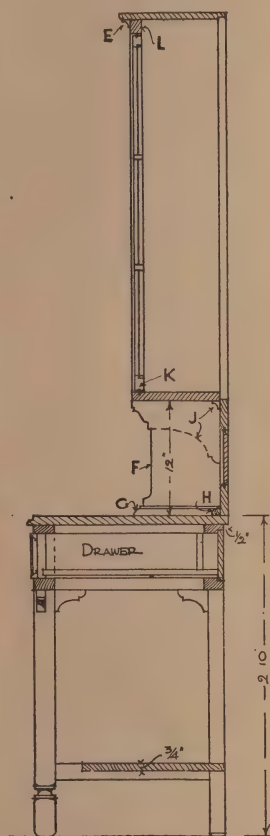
Enlarged Vertical Section of Dresser Sideboard with Sliding Doors
